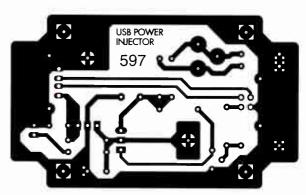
check your PC board carefully against this full-size etching pattern before installing any of the parts.
